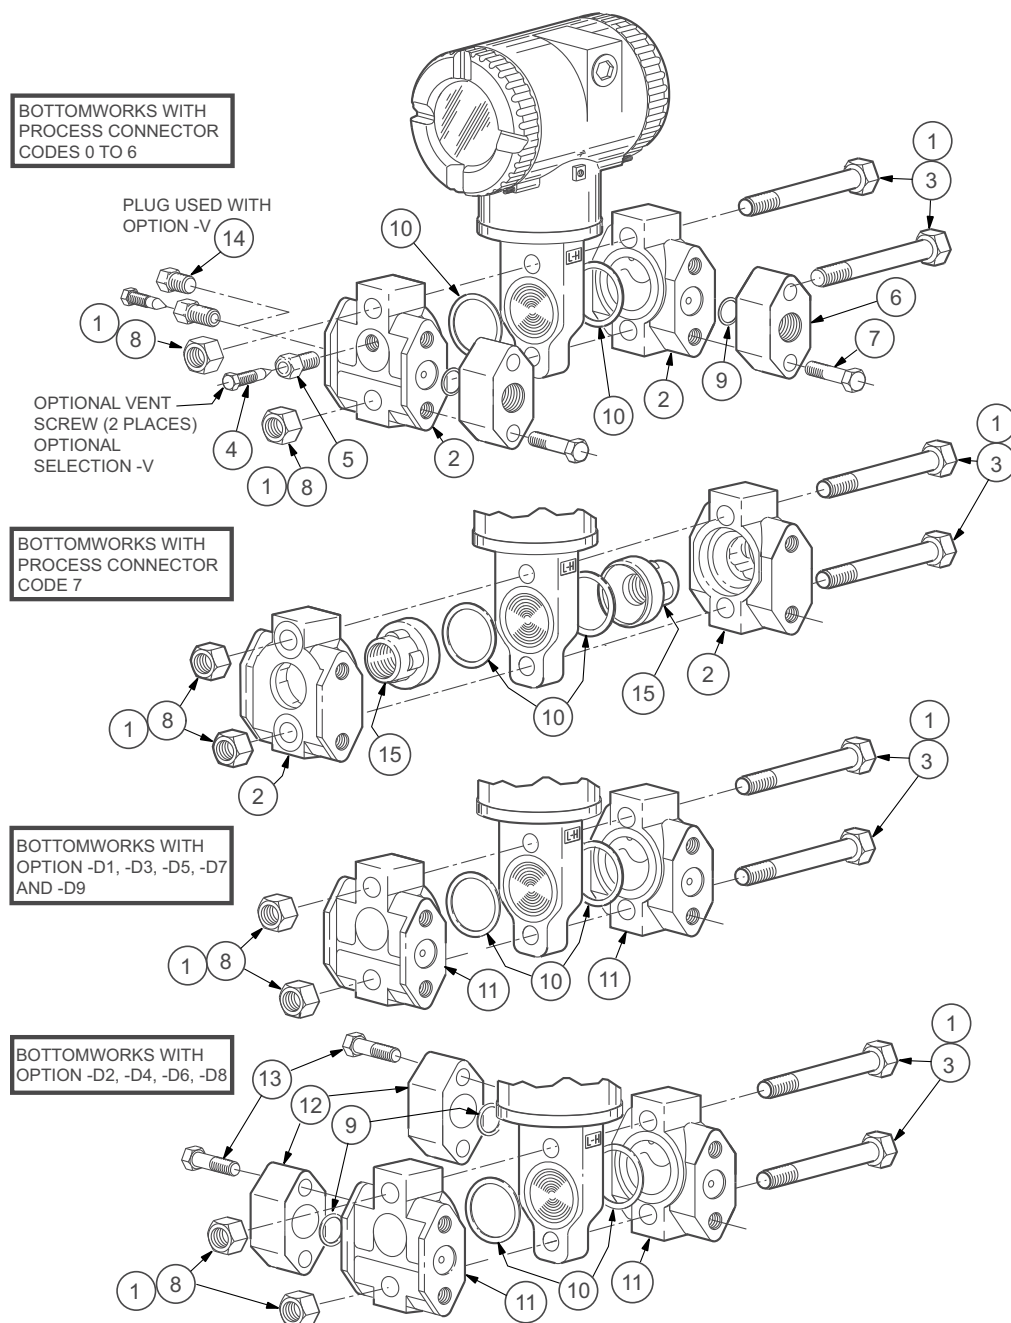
DP Transmitter Bottomworks for Use with Traditional Structures
